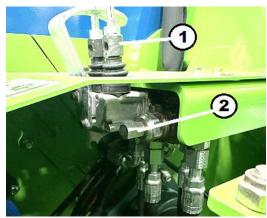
Pressure Adjustment Key 1 - Hand Valve Key 2 - Relief Cartridge
